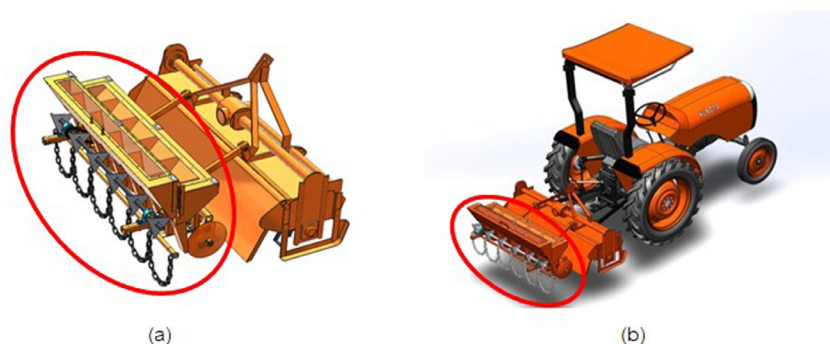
(a) Prototype of rotary hoe seeding machine for dry paddy field
